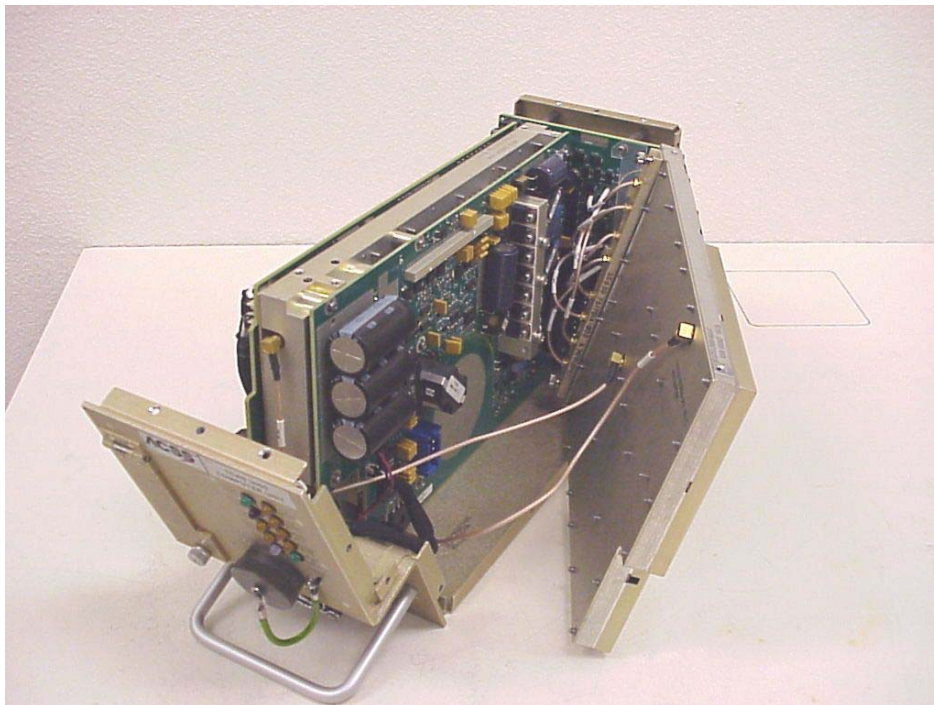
Left Side View of 4MCU Unit, Covers Removed
